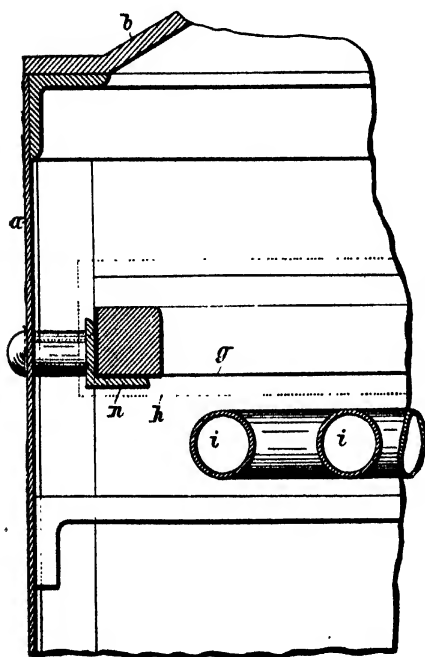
Eight-Tray Non-Automatic Steam-heated Tea Drying Machine (detail view drawn to an enlarged scale).
